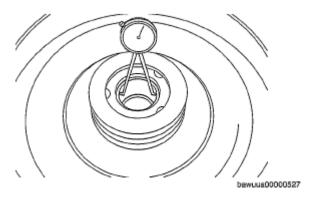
Inspecting Transaxle Case Bushing Courtesy of MAZDA MOTORS CORP.
